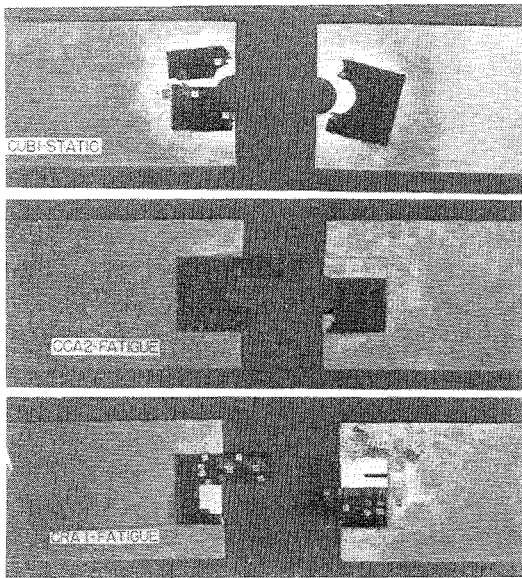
Reinforced cutout (CUB1), cutout-with-crack (CCA2), and transverse crack (CRA1) specimens.
